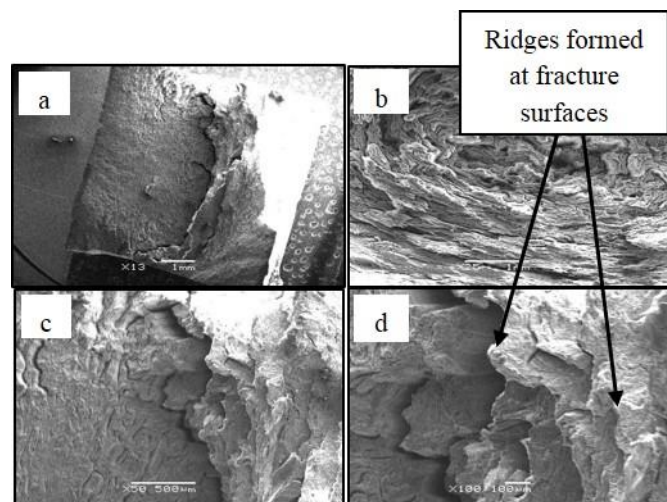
SEM micrographs showing the fracture surface of the tensile sample (billet temperature = 400°C, preheating time = 2 hours) extruded via flat-face die (S₂): (a) a broad view of brittle fracture surface; (b) the lamellar topography on fracture surface, 25x, (c) observed ridges emanated from the center, 50x and (d) 100x
